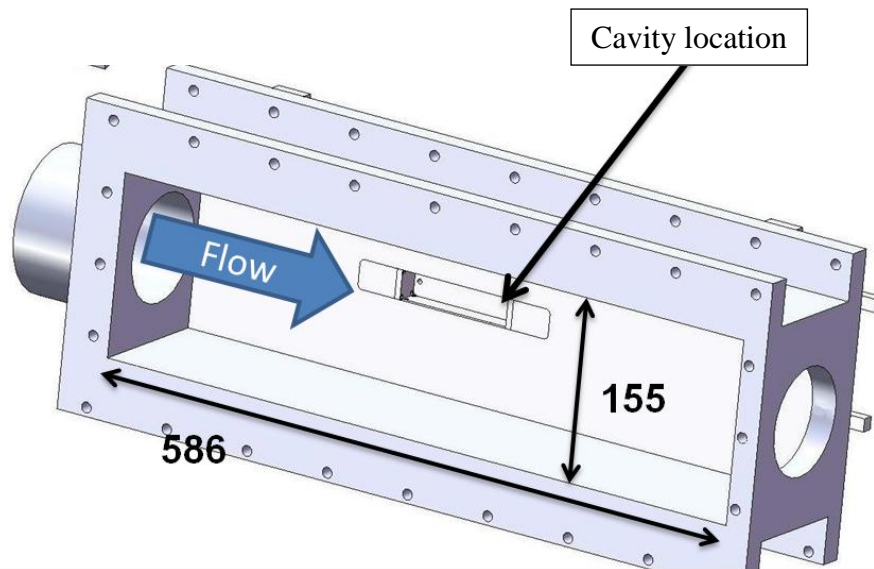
Sketch of the build 2 cavity installed into the side wall of the Cranfield 2.5” tunnel working section
